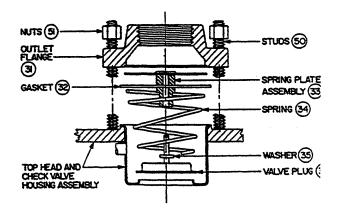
Exploded Anticipator Check Valve Assembly
